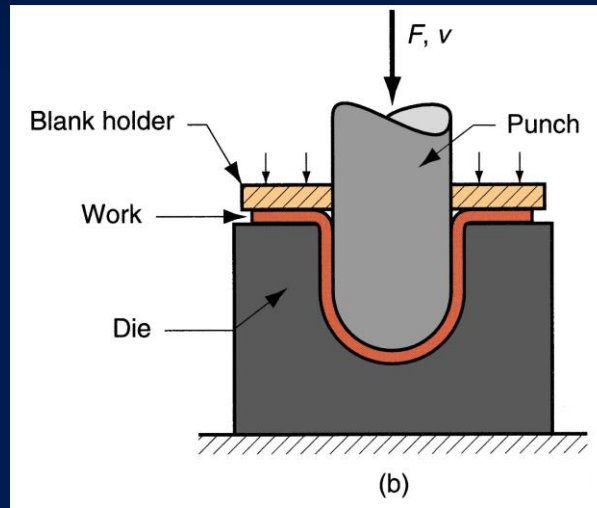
Basic sheet metalworking operations: (b) drawing
